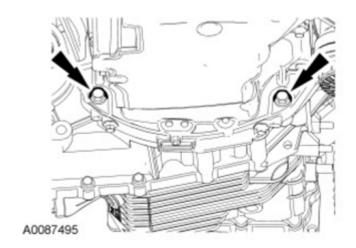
Locating Transaxle-To-Engine Bolts Courtesy of FORD MOTOR CO.
